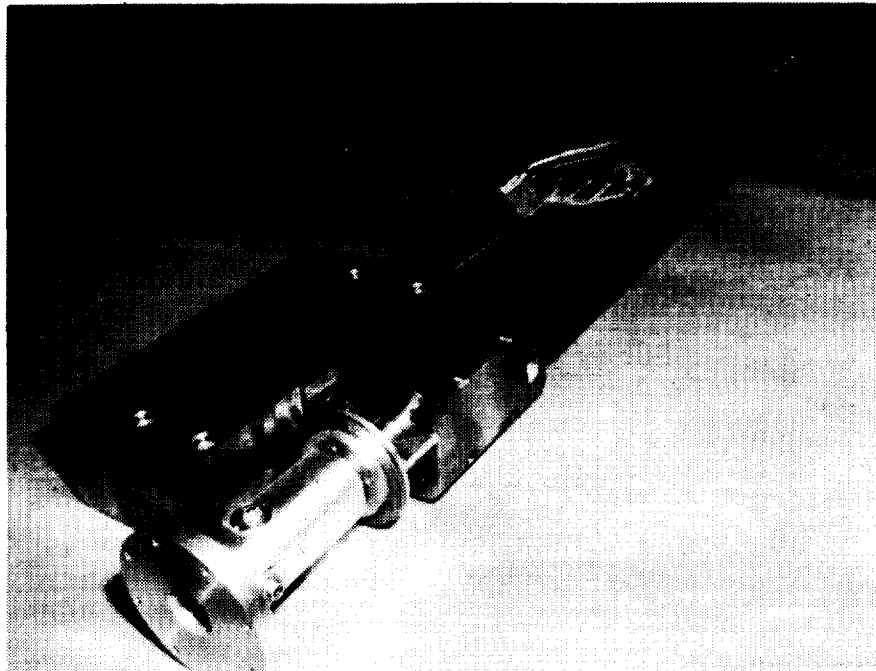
WING, SURFACE AND ACTUATOR ASSY.
